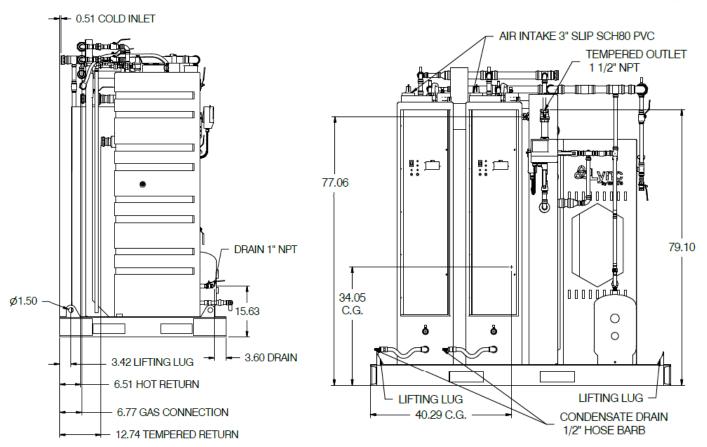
LC-N-400-2 Dimensional Drawing – Left Side & Front View
